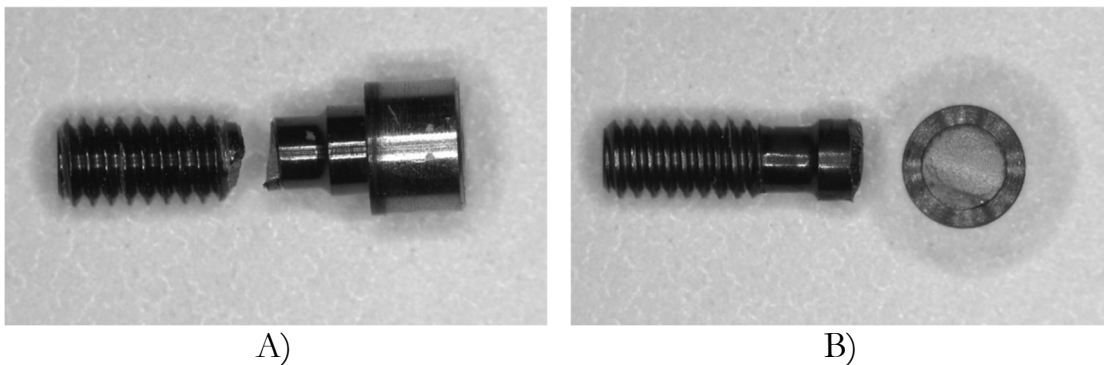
Fatigue failure of the prosthetic screw. A, First engaged thread in cut-threaded screw. B, Head-shank transition in roll-threaded screw.
